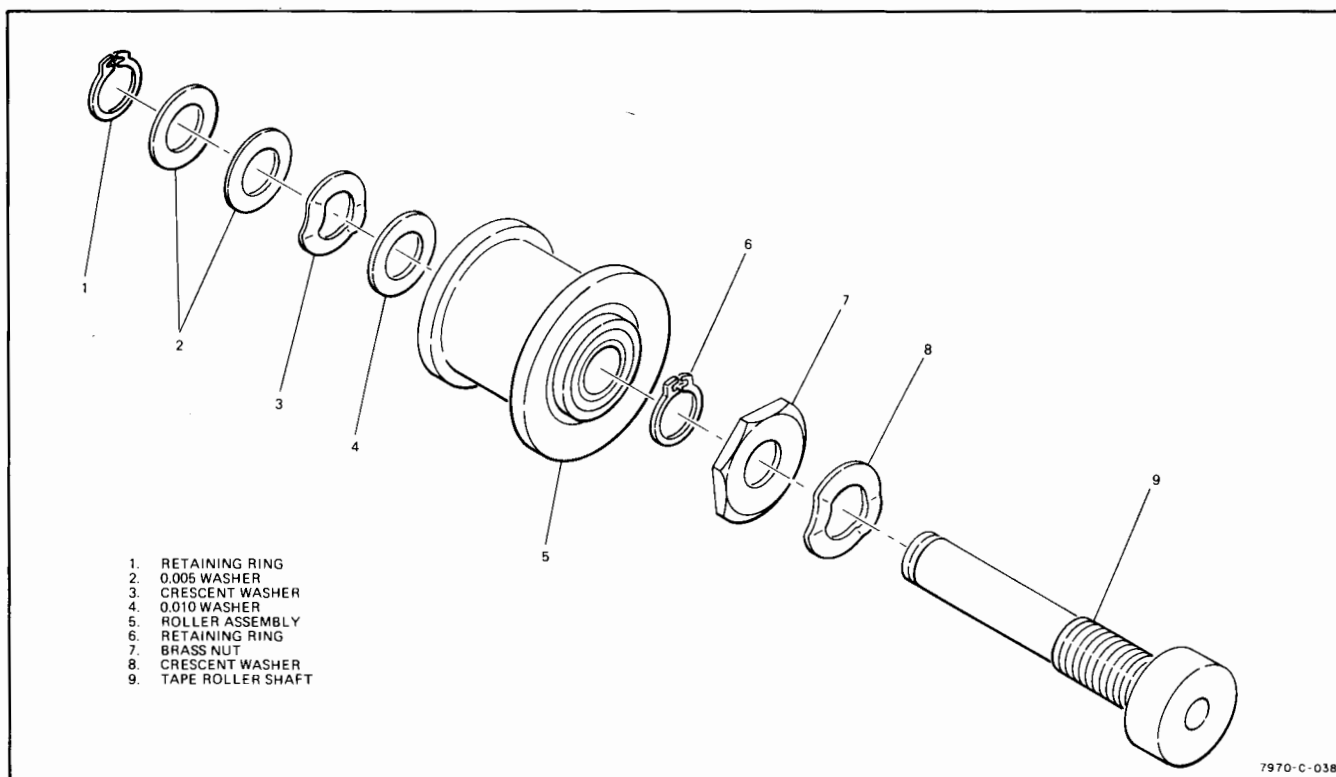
Tape Roller and Bearing Assembly, Exploded View
